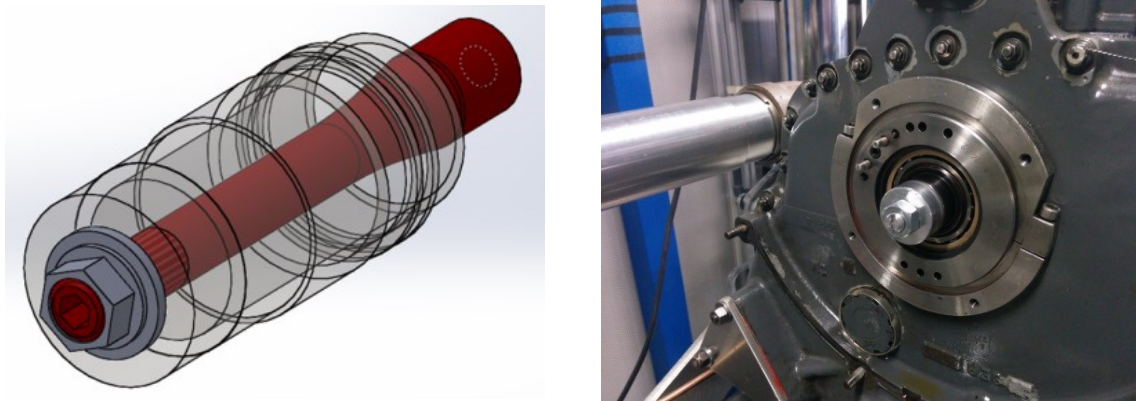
Double-geared mini-shaft and its internal shaft (the threads are not shown): 3D sketch (left); and installation (right)
